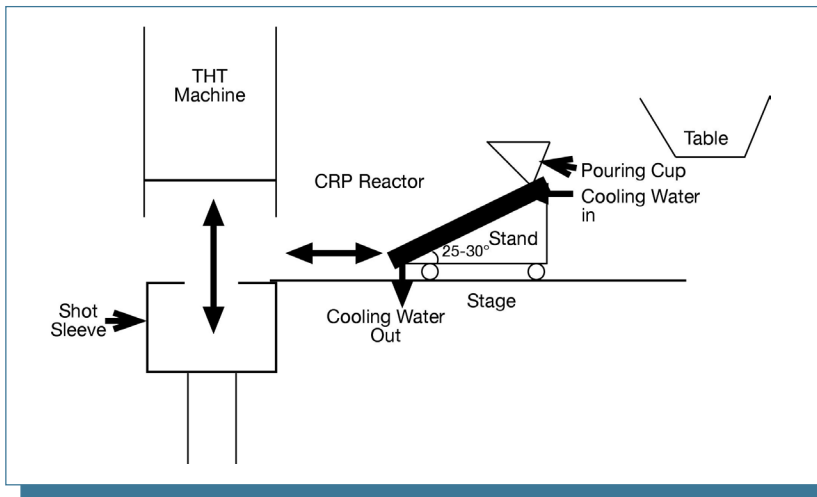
Schematic of CRP™ reactor adapted to the THT casting machine.
